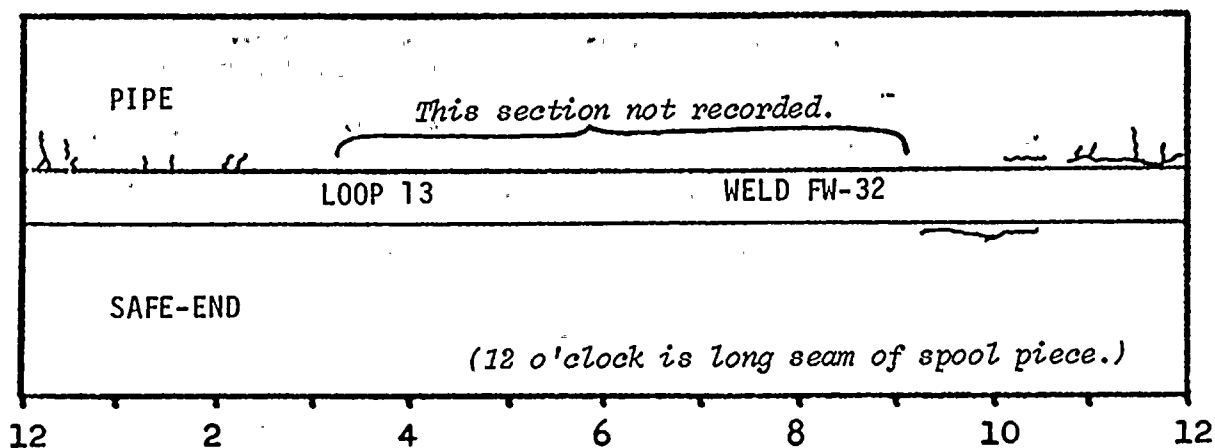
(Continued) Dye Penetrant inspection results, Loop 13 welds. (See Figure 3 for weld locations.)
